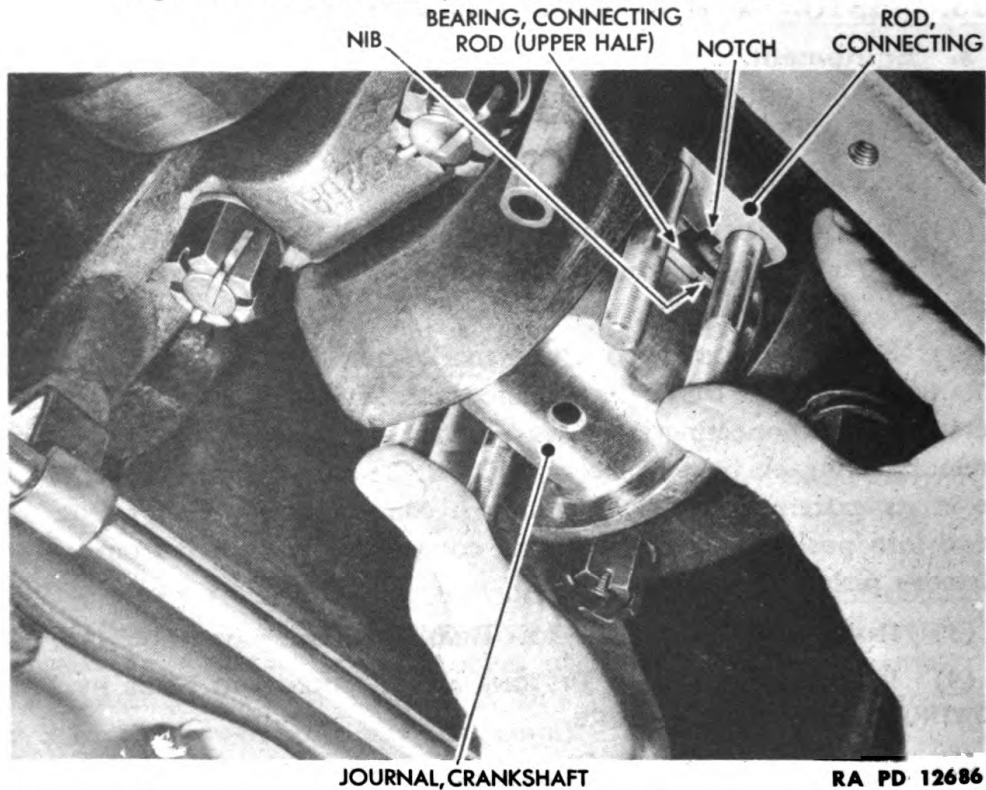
Removal of Upper Half of Connecting Rod Bearing
